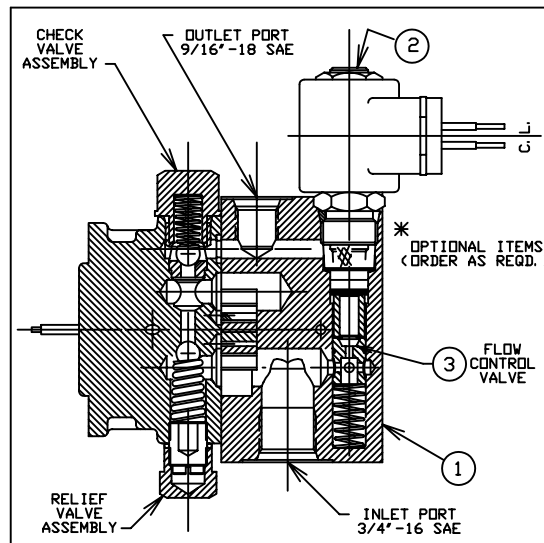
CROSS-SECTIONAL VIEW OF GEAR PUMP USED ON ZPL LIFTS:
